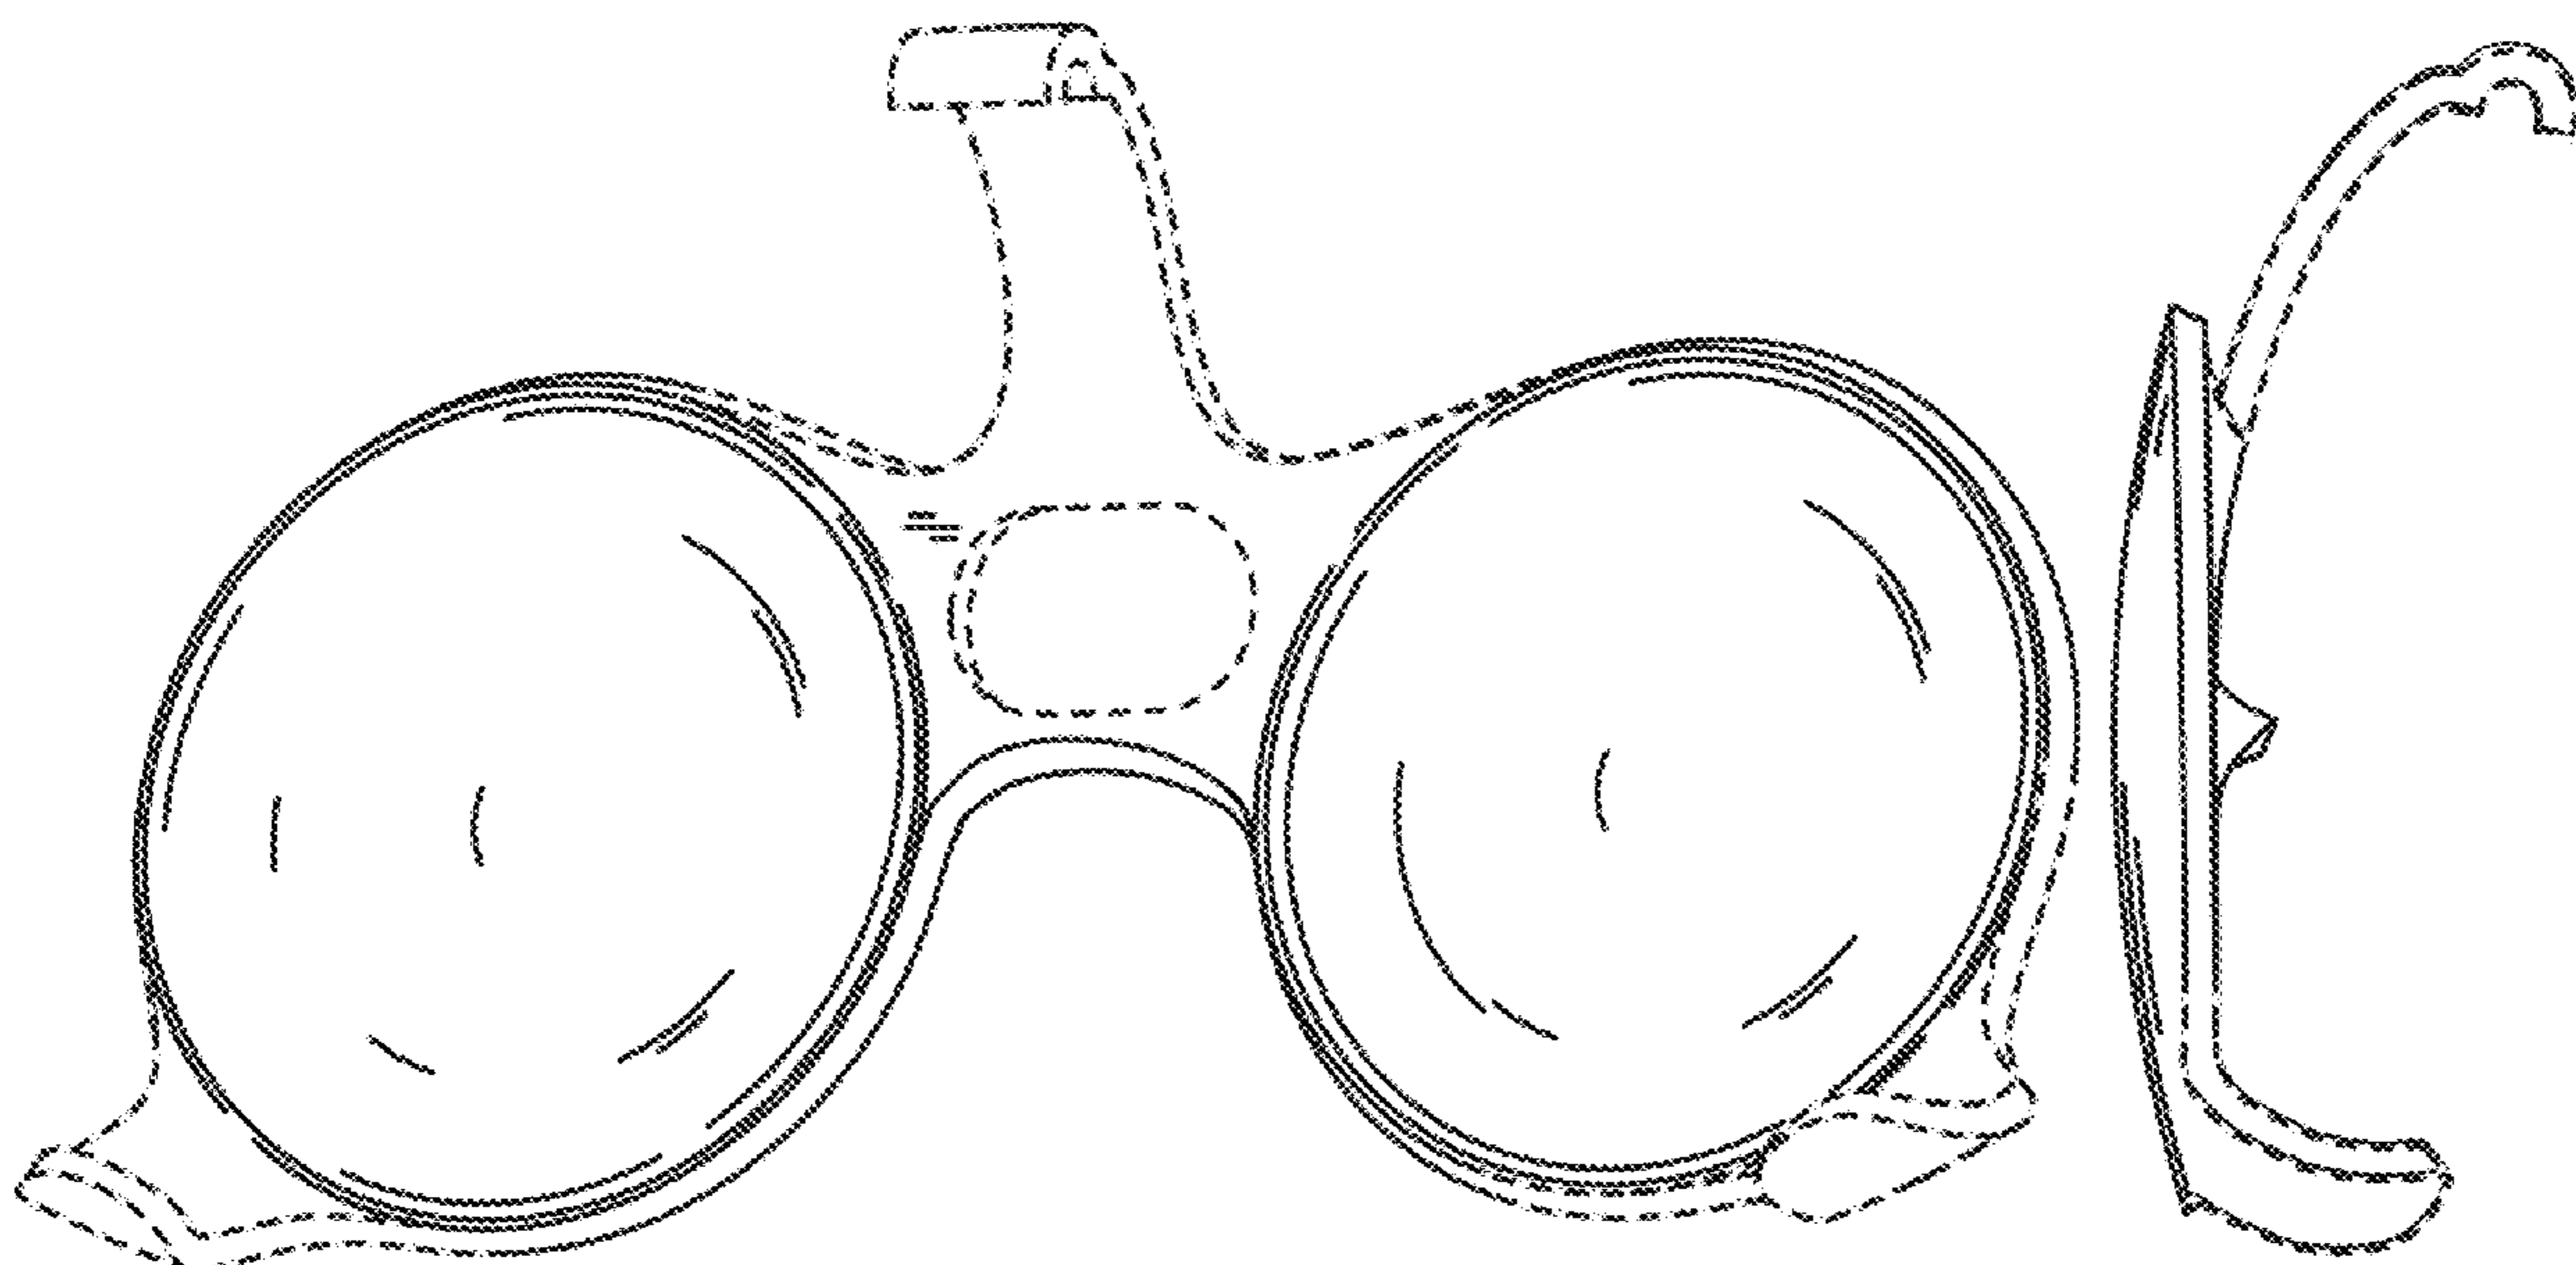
is a bottom view of the embodiment of FIG. 10; and,
